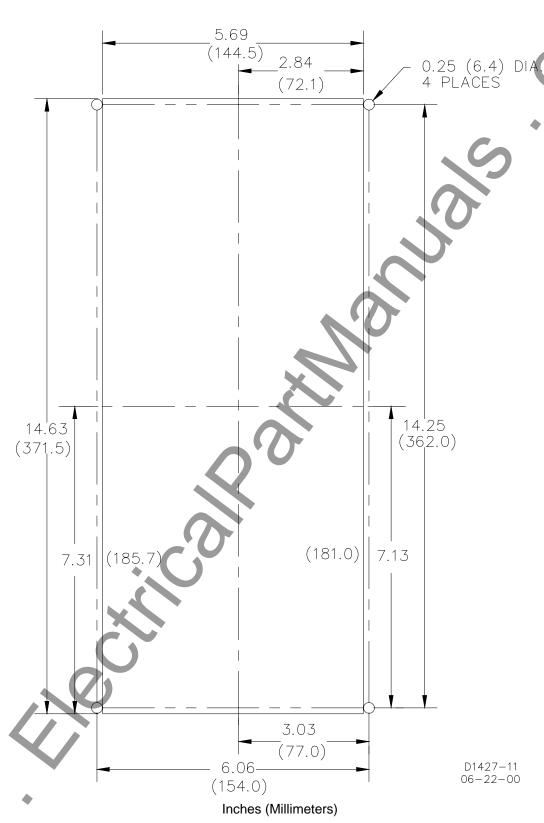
Panel Drilling Diagram (Semi-Flush Mounting)
